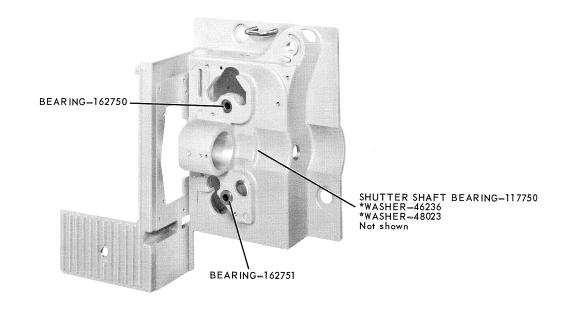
MECHANISM HOUSING ASSEMBLY-181004
